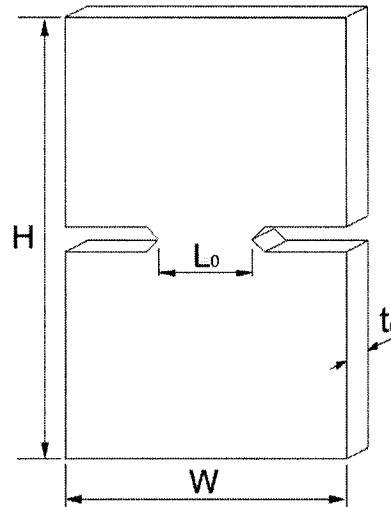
Double-Edge-Notched-Tensile (DENT) Specimen
